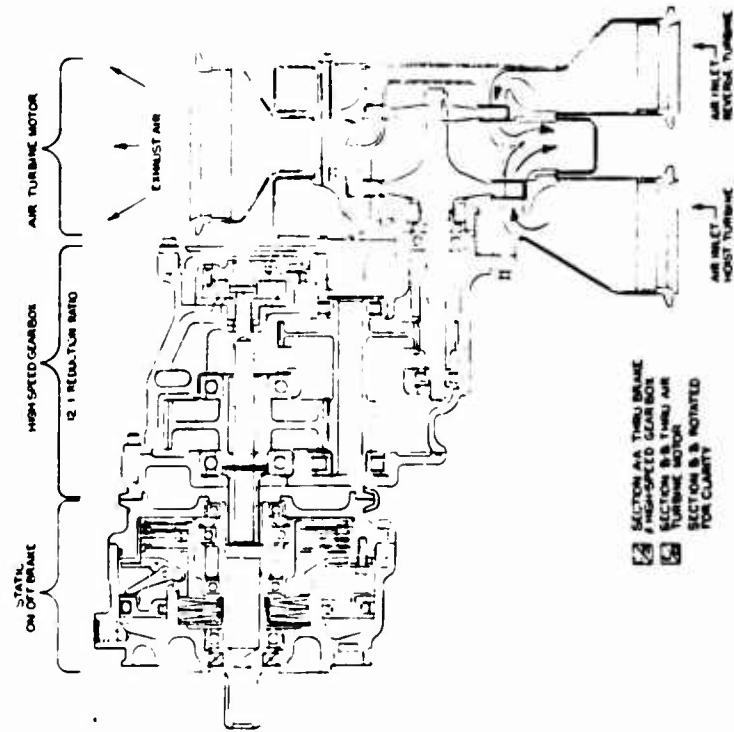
Arrangement of ATM, High-Speed Gearbox, and Brake.
